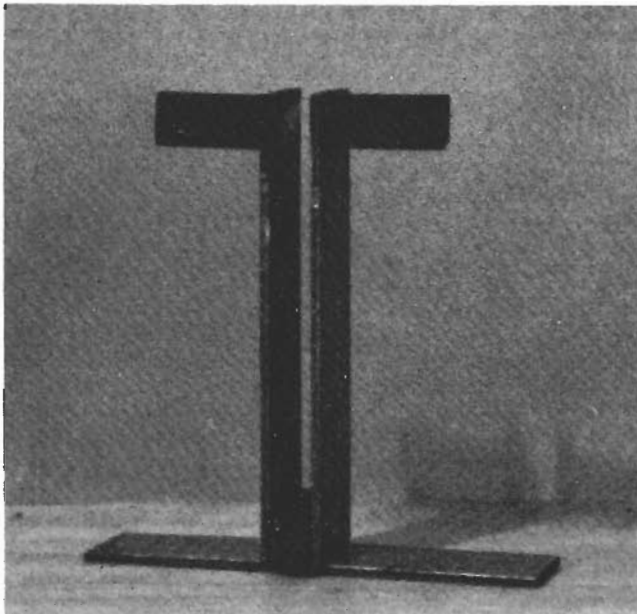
ASSEMBLING THE POLE pieces and magnets to form the MHD chamber couldn't be easier.
